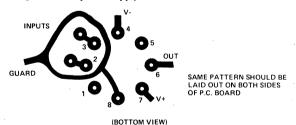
Board Layout for Guarding Inputs with Guarded TO-99 Package
